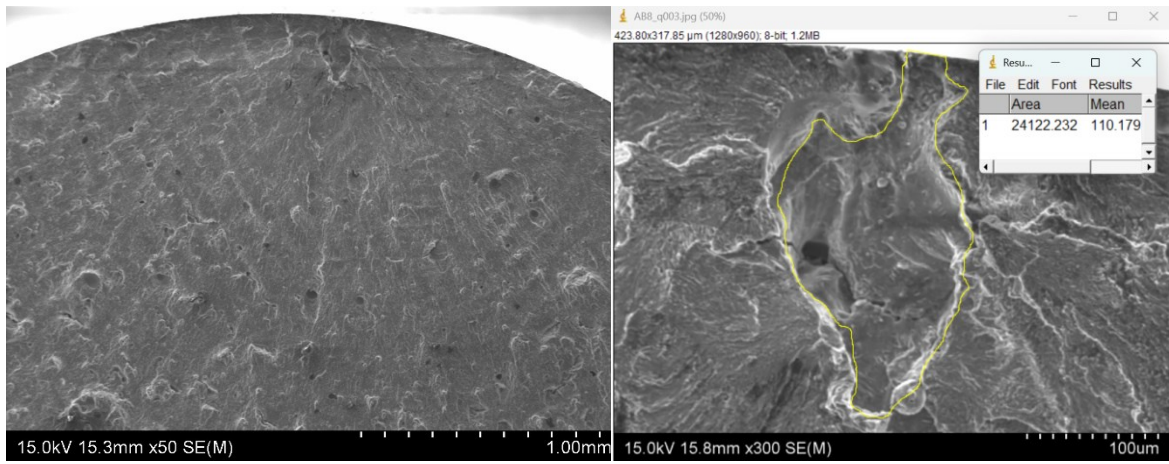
Fracture surface of sample CD_LBD-AB-2 a) x100, b) x200.
